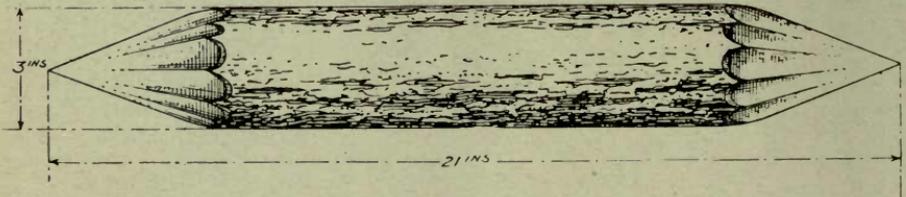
Drawing showing standard dimensions of a mine sprag.
